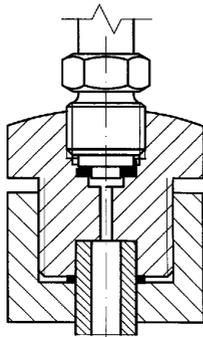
Cylindrical thread, sealing with seal at sealing surface
